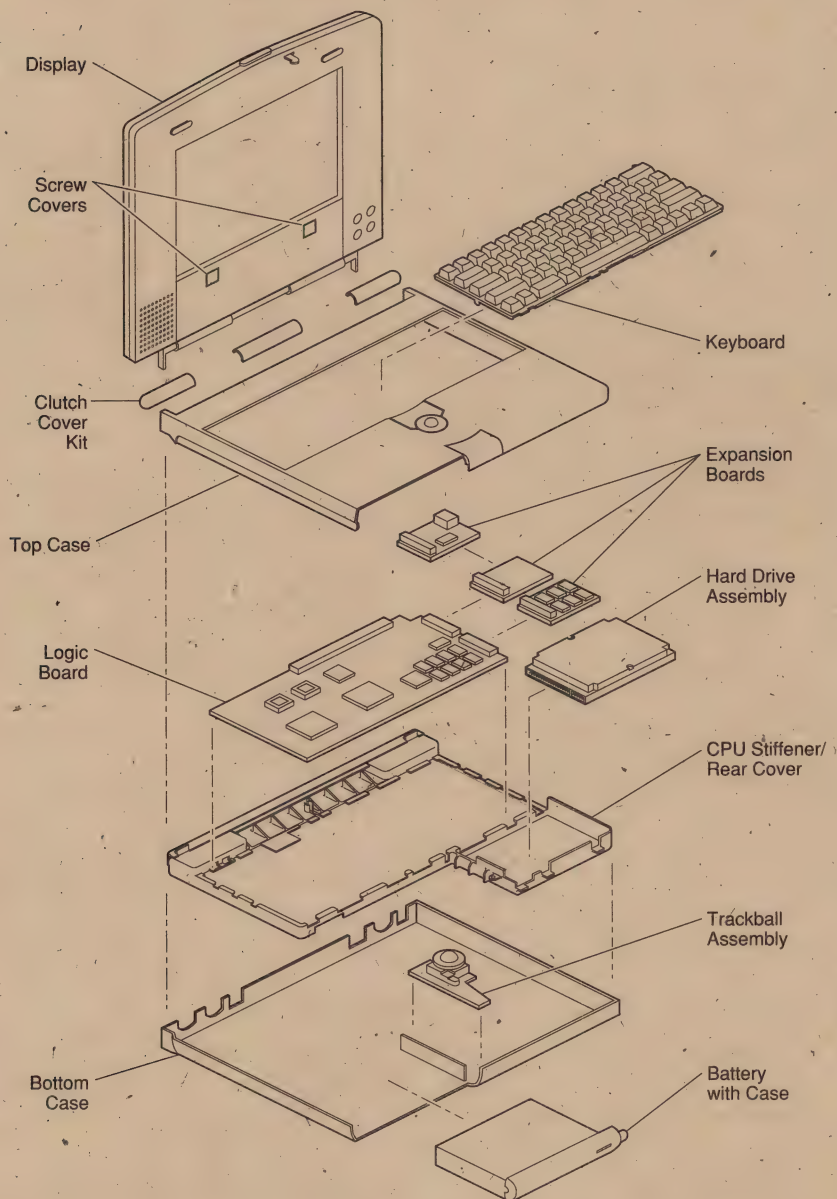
Macintosh PowerBook Duo 210 and Duo 230 Exploded View
